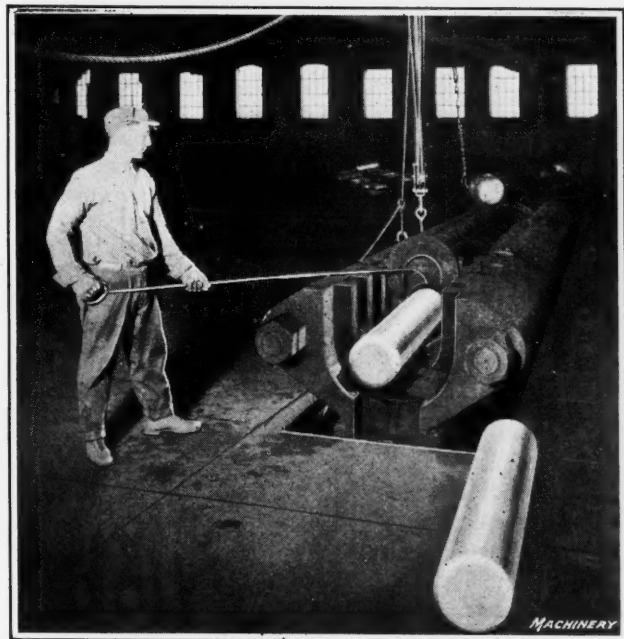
Drawing Hot Cup into Seamless Tube in Series of Dies
